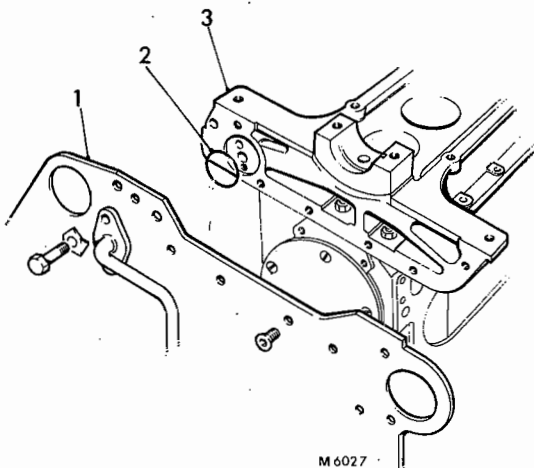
LOCATION OF O-RING IN TAPPER BLOCK
